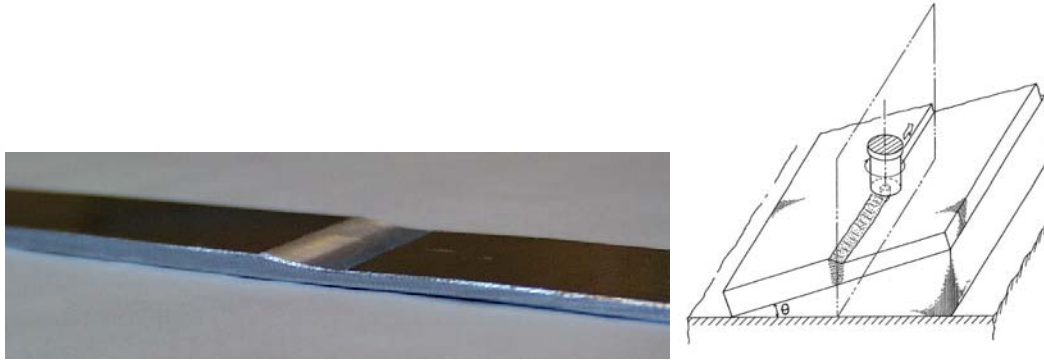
Tailor welded blank on AA5754 H22 on thicknesses 1 and 2 mm. Welding was done on a fixture with inclined table at a speed of 6 m/min. © ESAB
